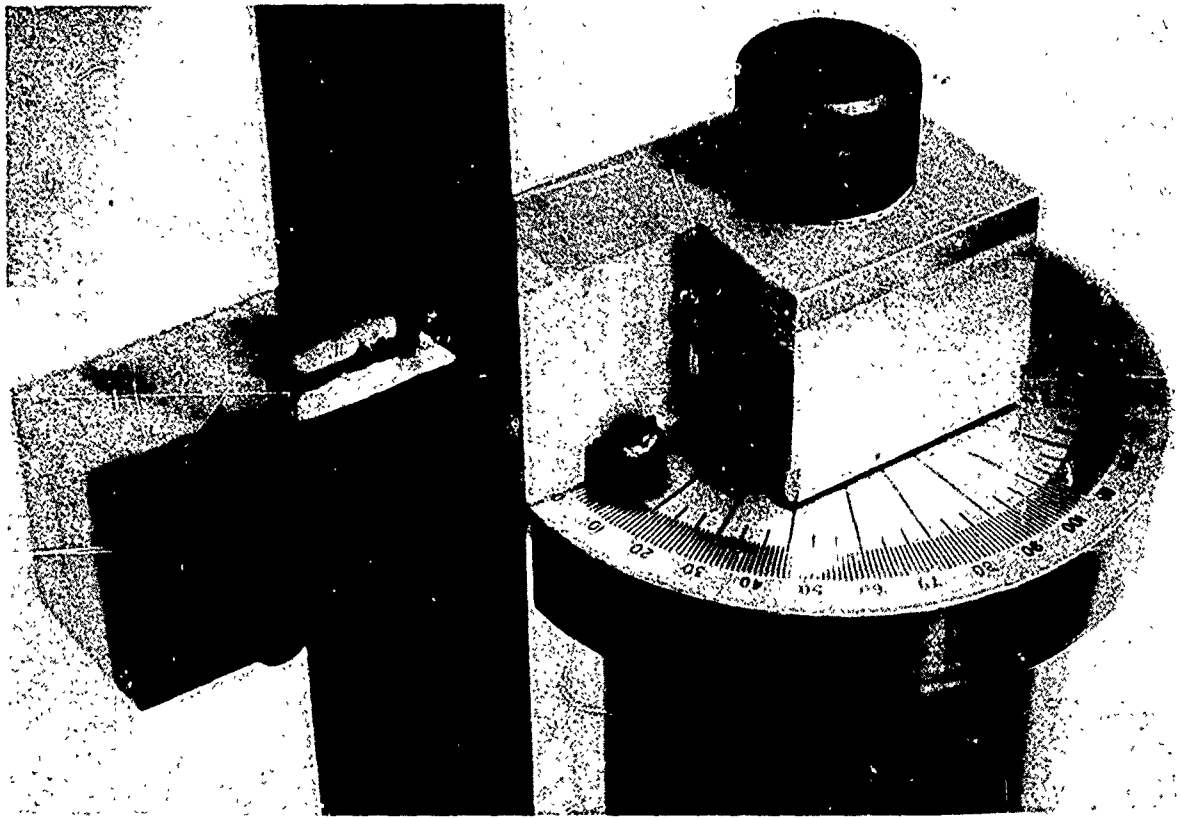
DETAIL SHOWING FLANGED END OF FIXTURE FOR
